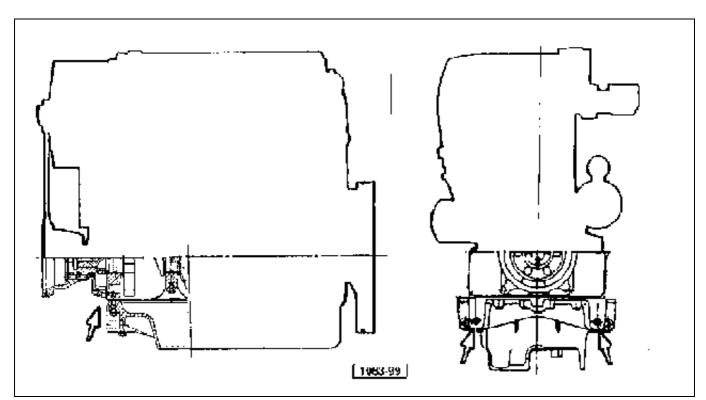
Positions for reading dimension difference between front oil pan and engine block planes.
